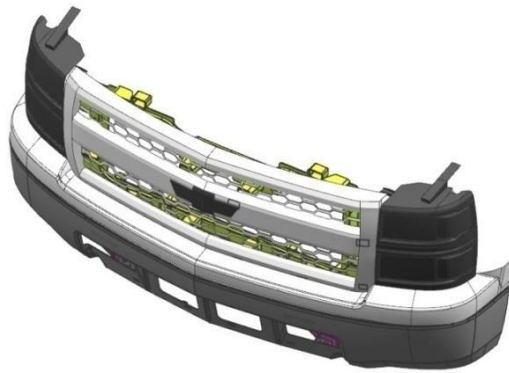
Baseline Front Bumper Assembly (Grill Also Shown)
